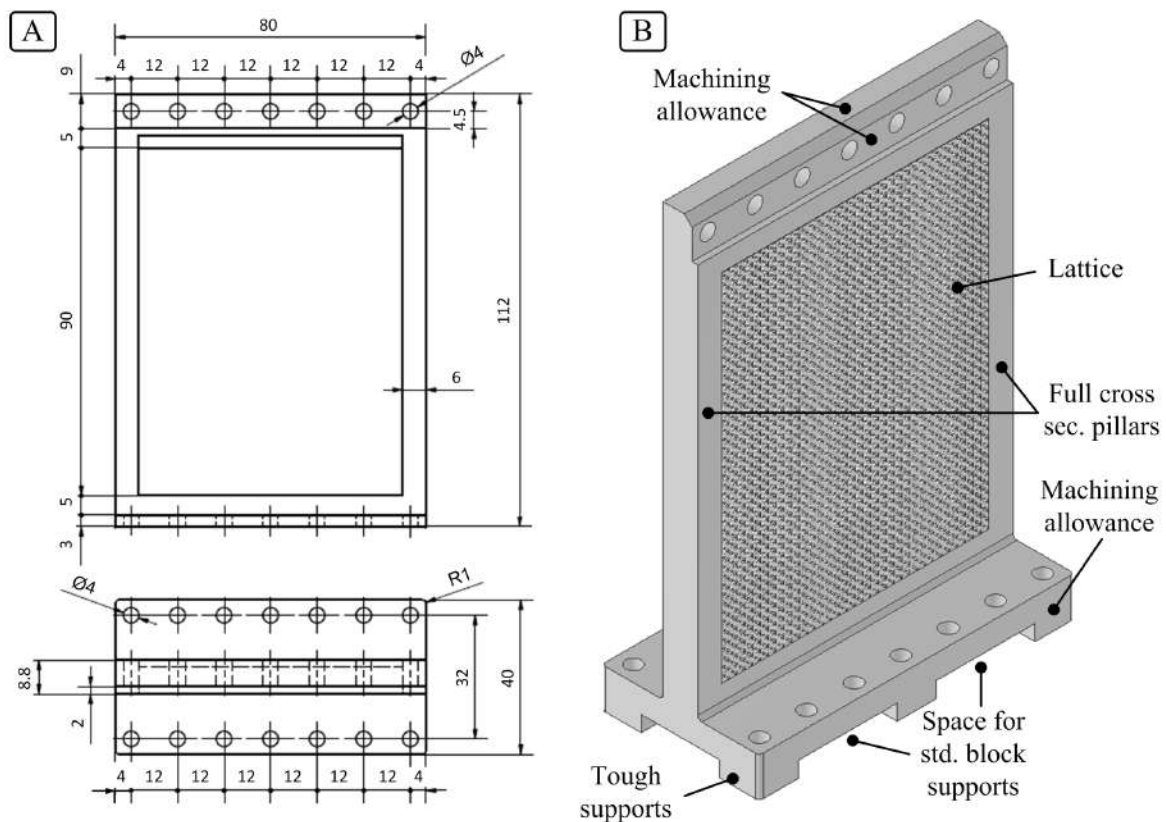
Blade-like benchmark geometry: dimensioned orthogonal view (A) and isometric view of the raw part after 3D printing (B).
